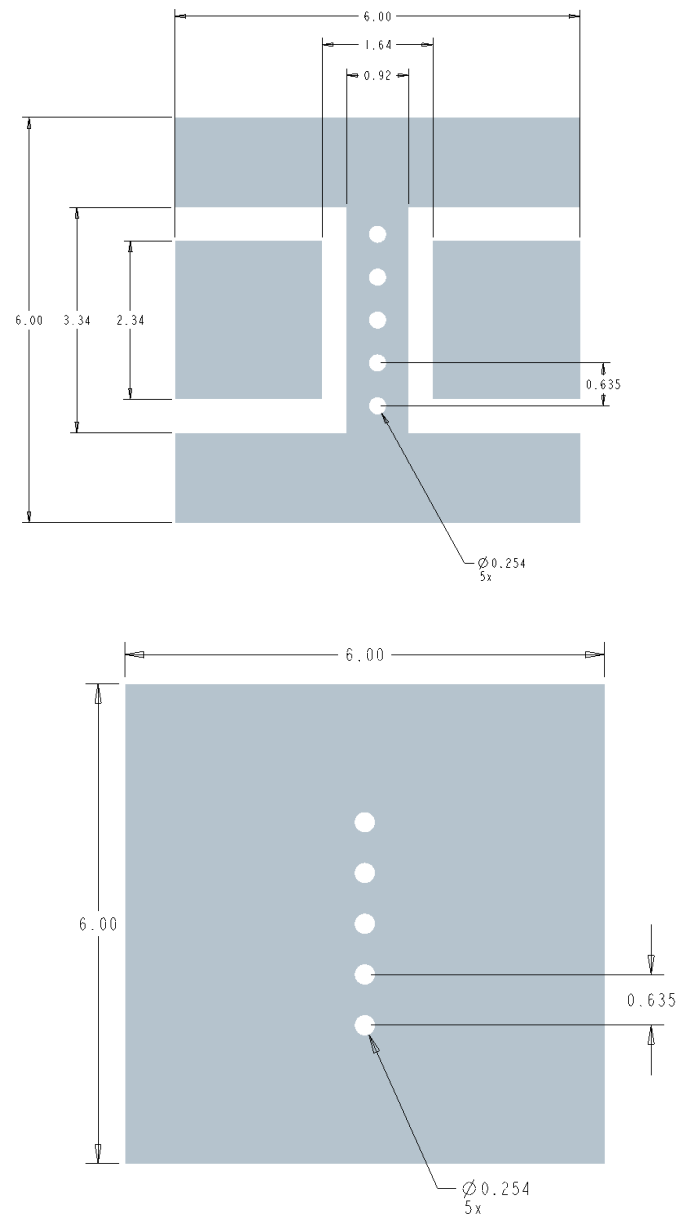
Minimum footprint for XLamp XB family of LEDs on FR-4 PCB (top and bottom)
